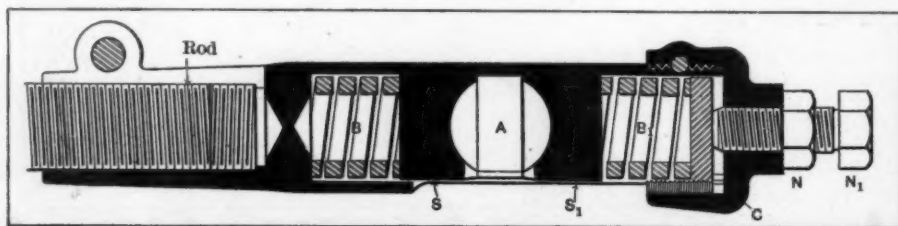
Cross-section of the terminal member of a drag-rod, showing the use of bumper springs, a means for locking, and a method of adjusting the tension of the springs
